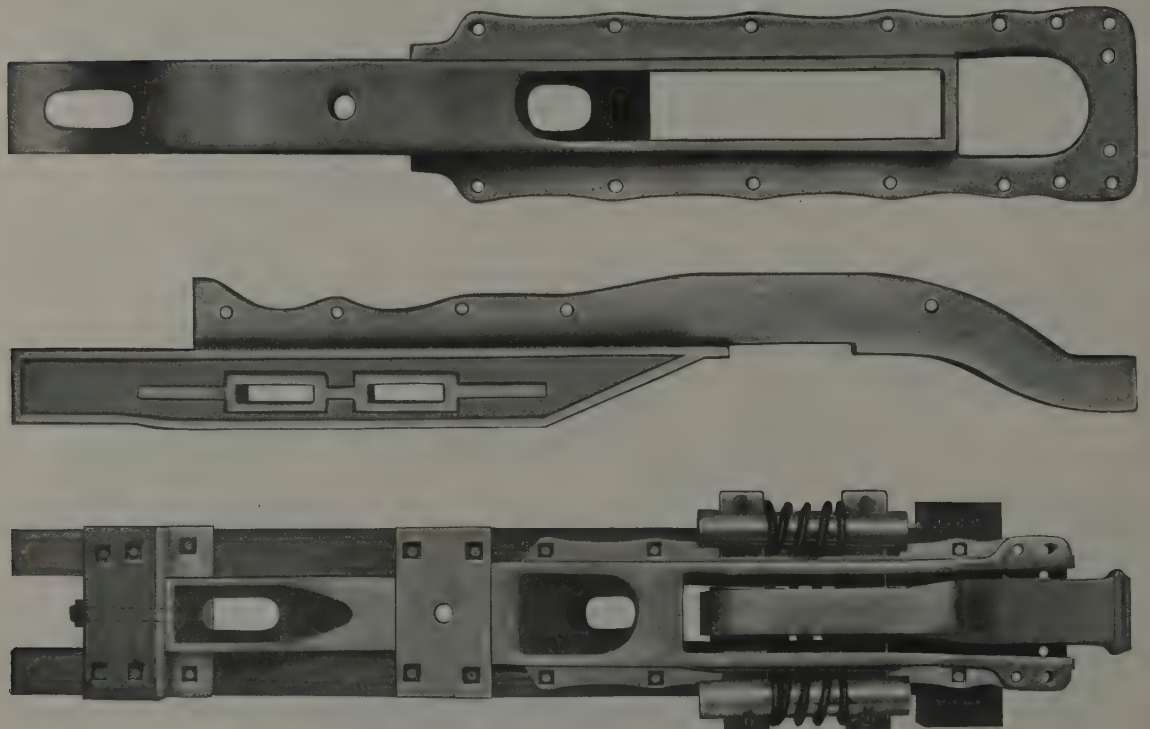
Cast Steel Draft Arms. Chicago Steel Car Company.
